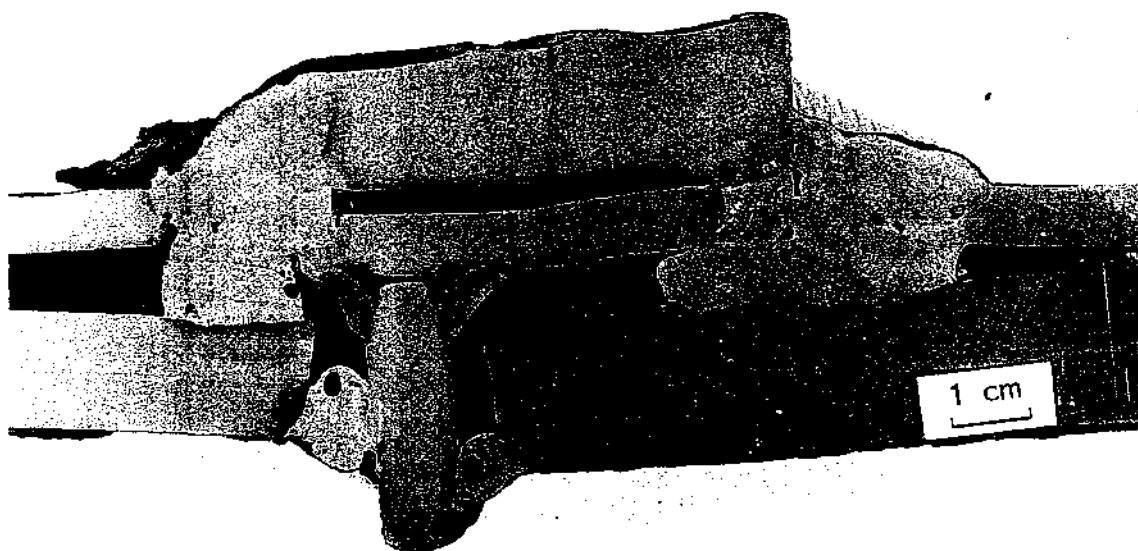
Metallurgical horizontal section through side locking lug, aft bulkhead, vertical stiffener and repair pieces of side lock site in MV DIANA II.
